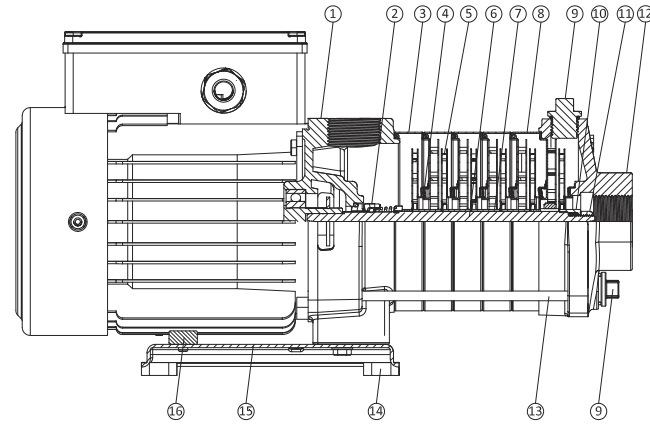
SH, SHI & SHN 2 with SMG 71 motor
